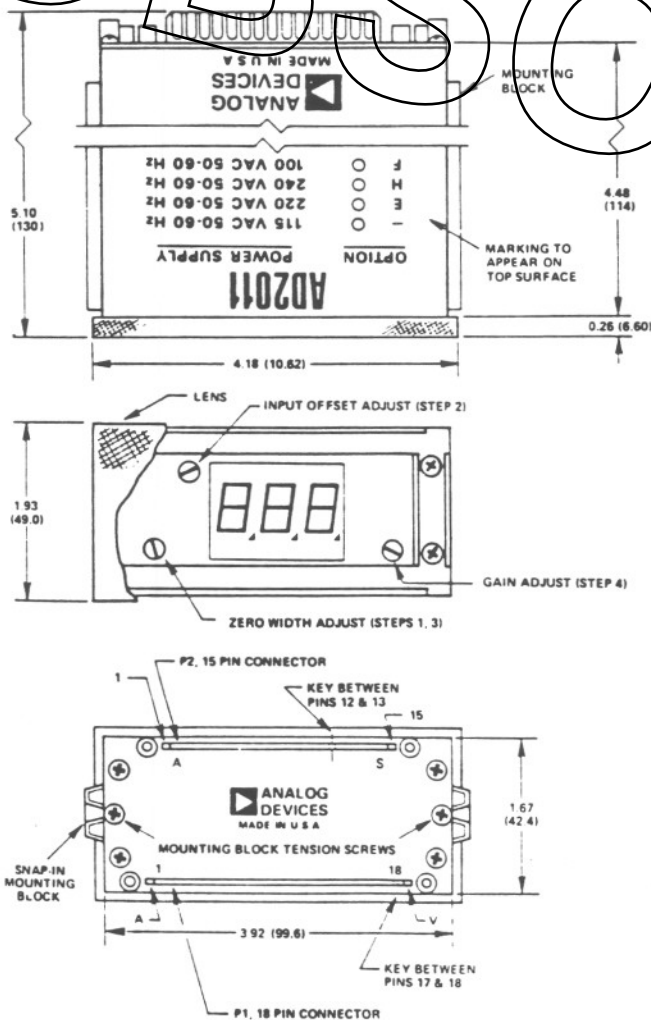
AD2011 Mechanical Outline (Dimensions shown in inches and (mm))
